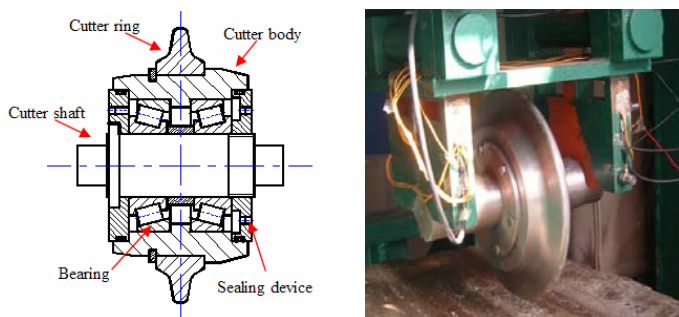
Left: Assembly drawing of disc cutter; Right: experimental disc cutter in test-bed
